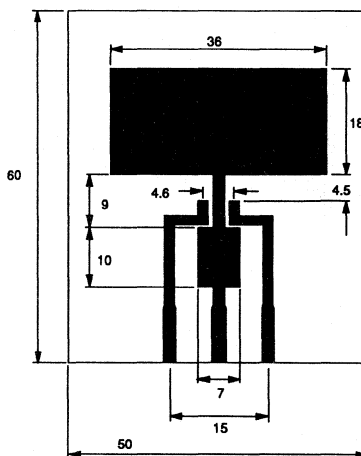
PCB for thermal resistance and power rating for SOT-223.
